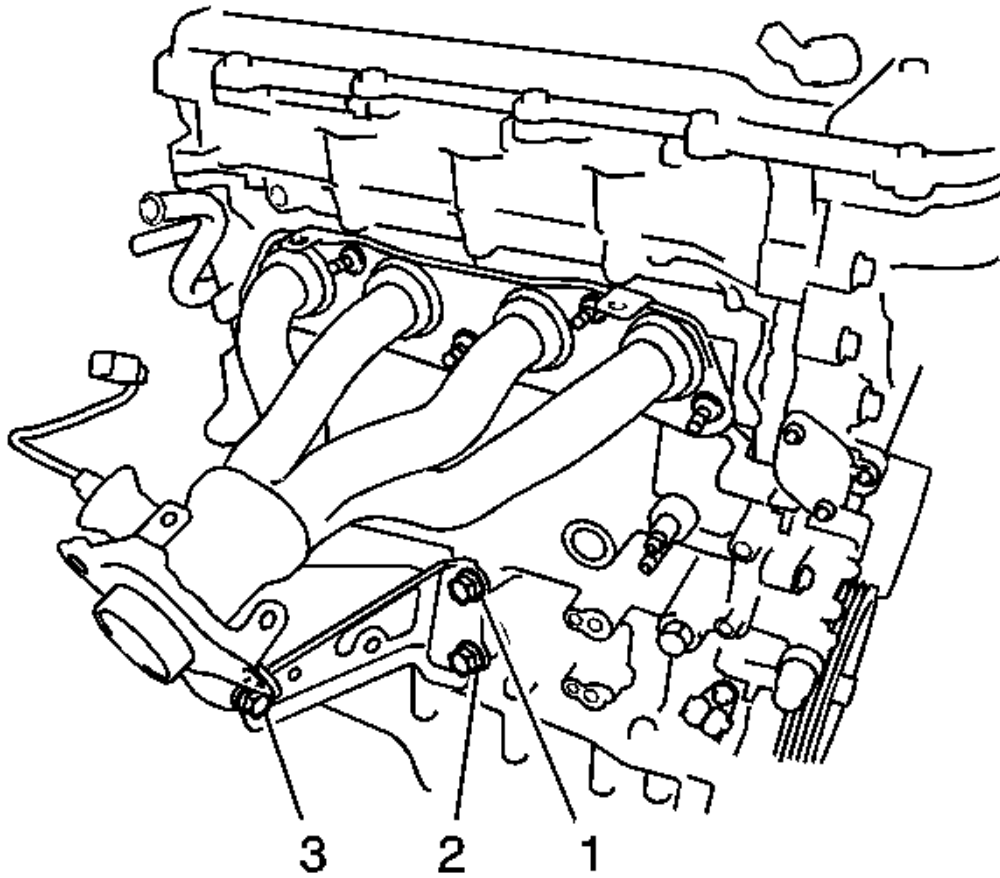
Identifying Exhaust Manifold Bolts & Stay
